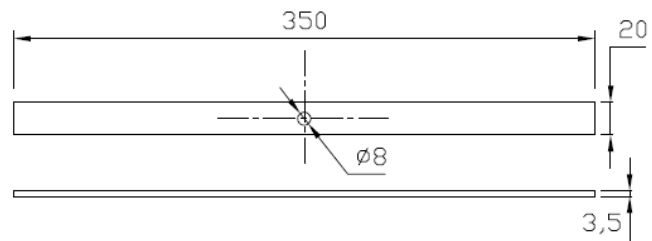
Specimen Geometry (As per ASTM D3039, All dimensions are in mm)
